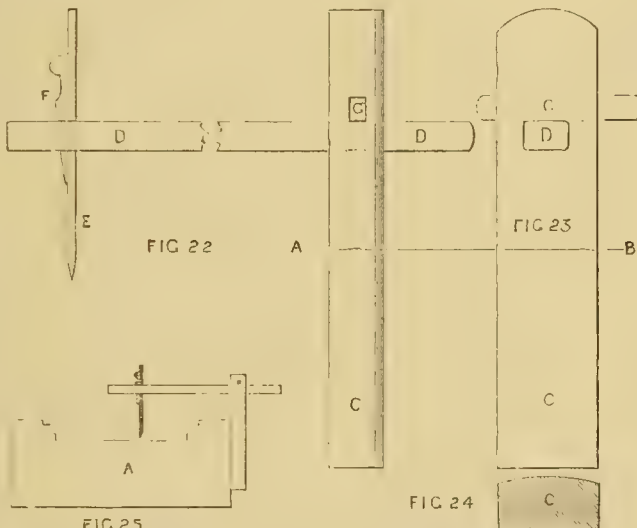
LONG TOOTH GAUGE, SIDE ELEVATION. FIG. 23.—DITTO, END ELEVATION. FIG. 24.—SECTION THROUGH A B. Scale of Figs. 22, 23, 24, 3 in. to 1 ft. FIG. 25.—MODE OF USING LONG TOOTH GAUGE.
